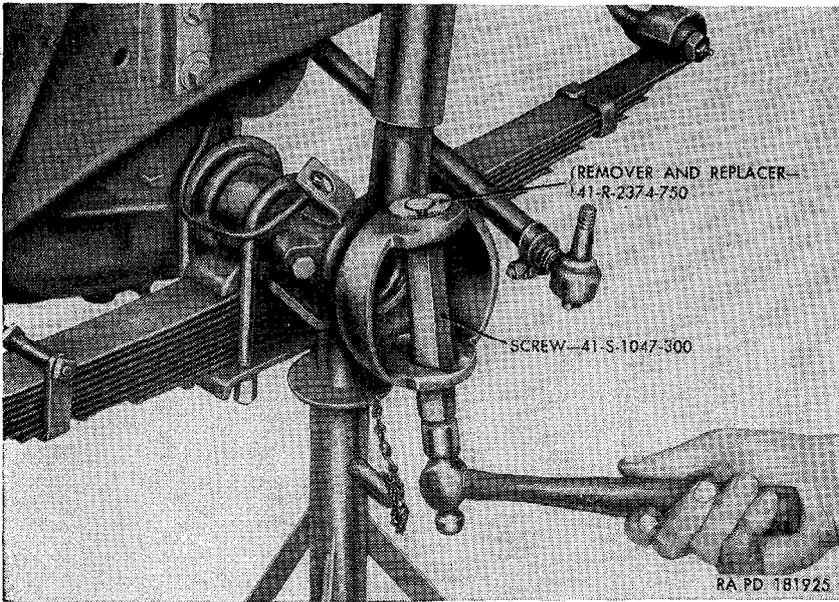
Removing steering knuckle flange bearing cup from front axle housing, using remover and replacer 41-R-2374-750 and screw 41-S-1047-300.
